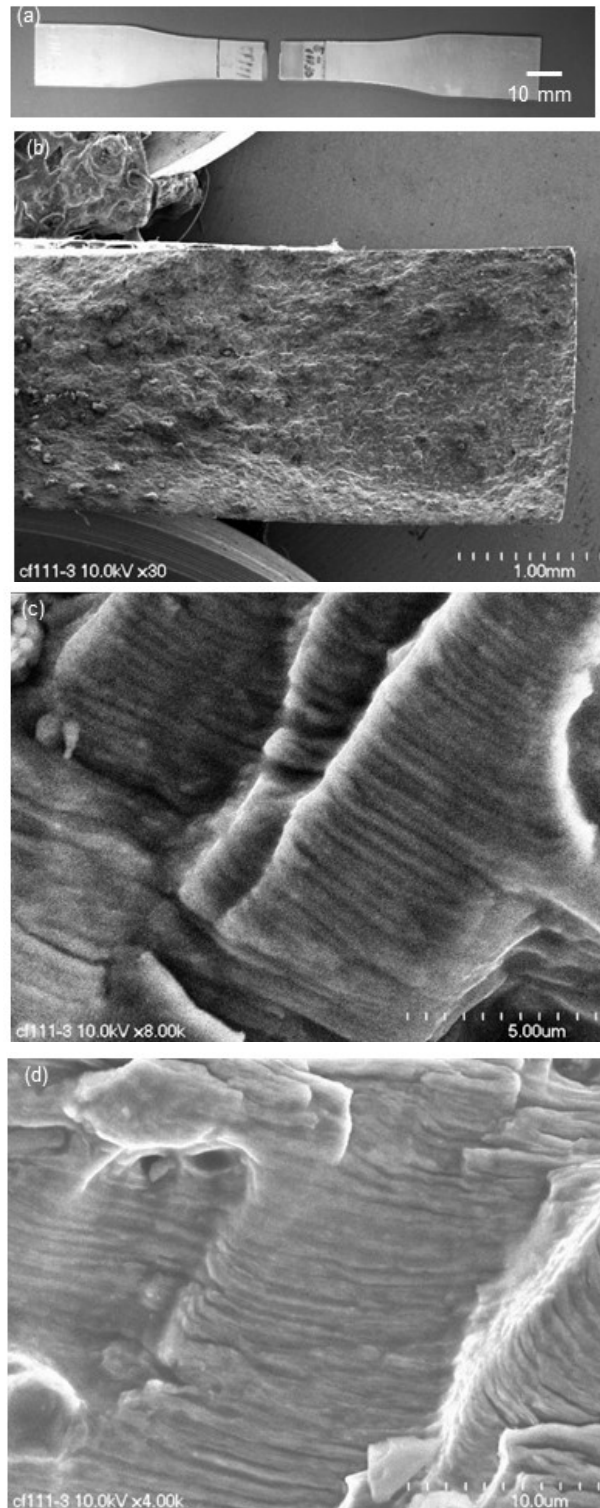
Fracture surface when the burr is the origin of fracture ( $\Delta\sigma = 225$  MPa, failed at 223k cycles) (a) top view, (b) fracture surface between the burr and the final failure surface, (c) 1.60 mm from the origin of fracture, (d) 2.11 mm from the origin of fracture
